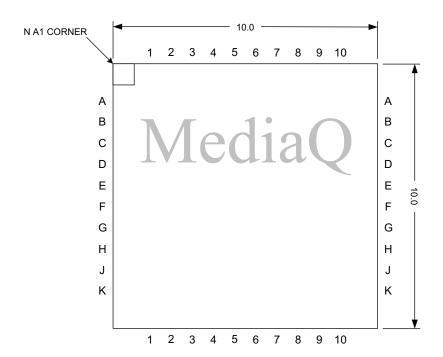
MQ-1100 - BGA Package Top View with Dimensions in Millimeters
